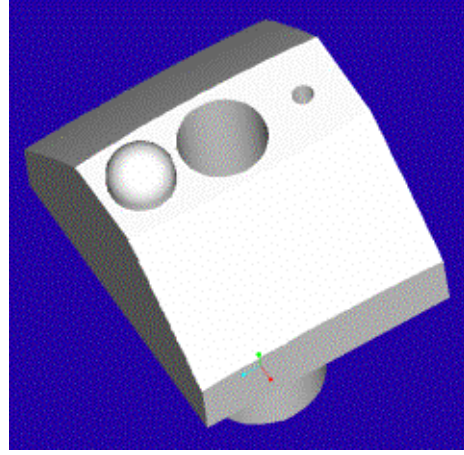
Canoe ball mount with integrally machined measurement hemisphere.
